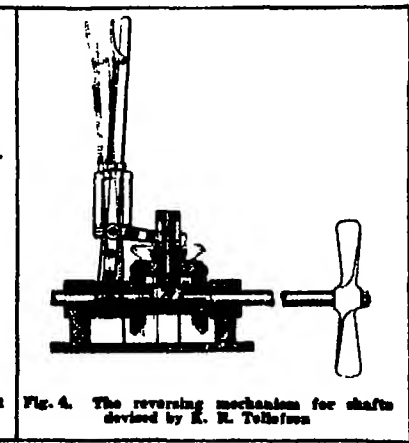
The reversing mechanism for shafts devised by K. R. Tellefson, showing a mechanical device with gears and a handle.
